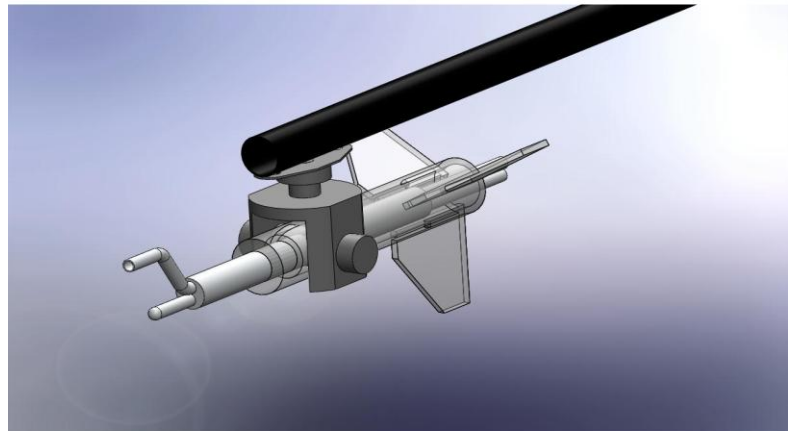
Solidworks CAD model for multi-axis pivot joint.
